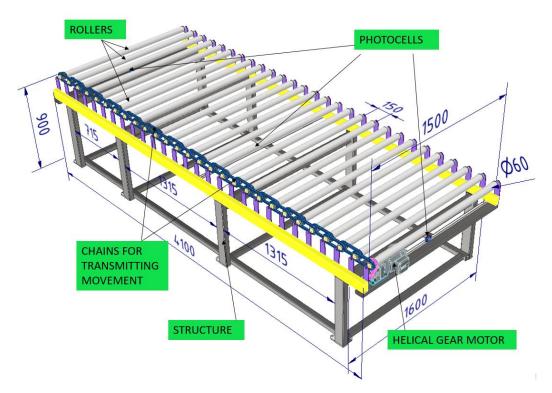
Roller conveyor before grinding machine in Autodesk Inventor.
